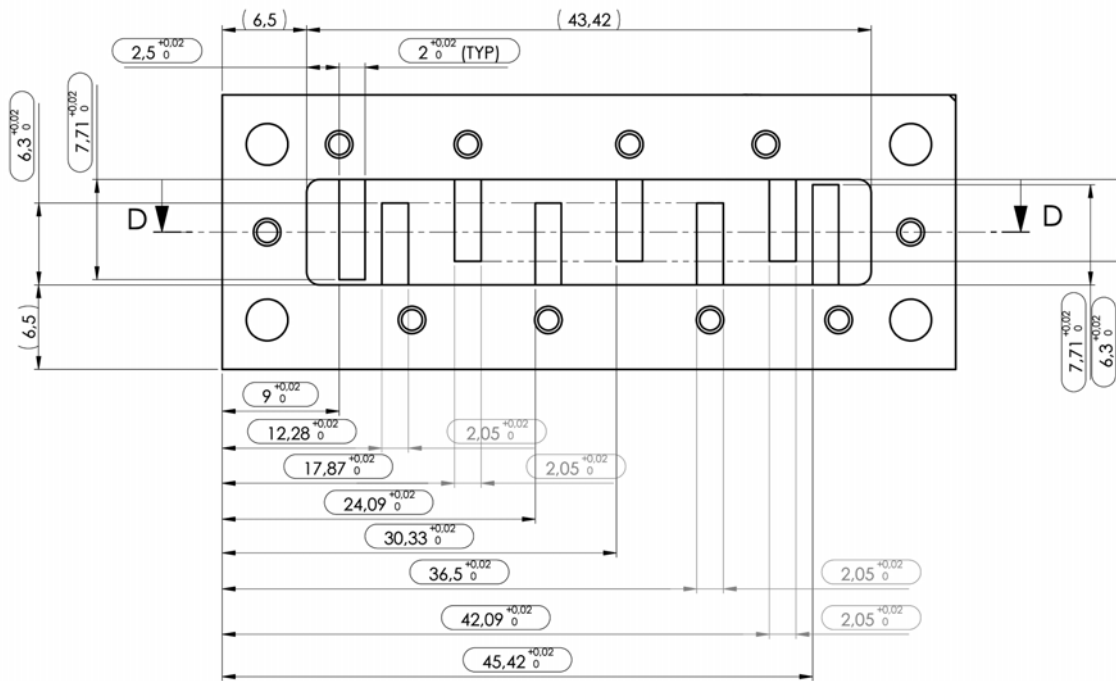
Filter 2 (Version 3), Dimensions (a).
